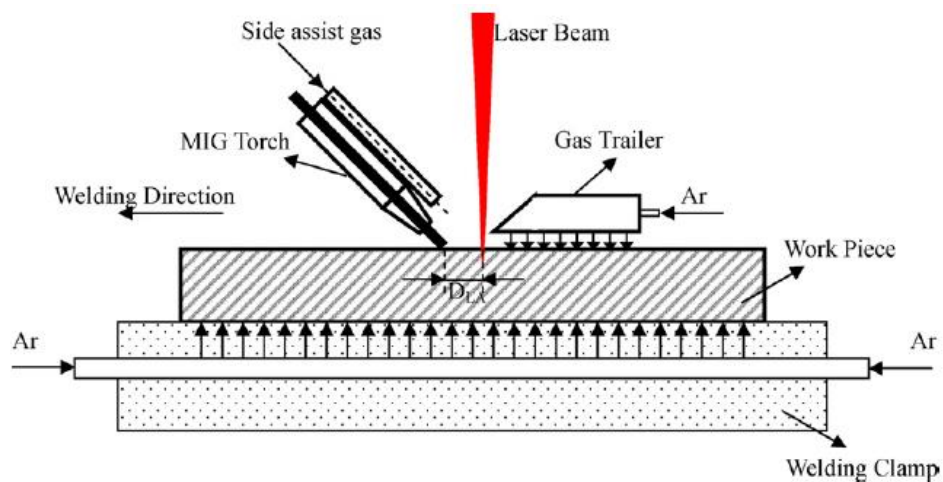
Setup of laser-MIG hybrid welding [171].
